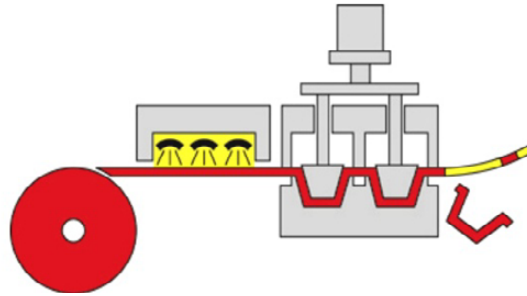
Principle of deep drawing: The plastic sheet is heated and then pressed into a negative form. (Image by Illig Maschinenbau GmbH)
